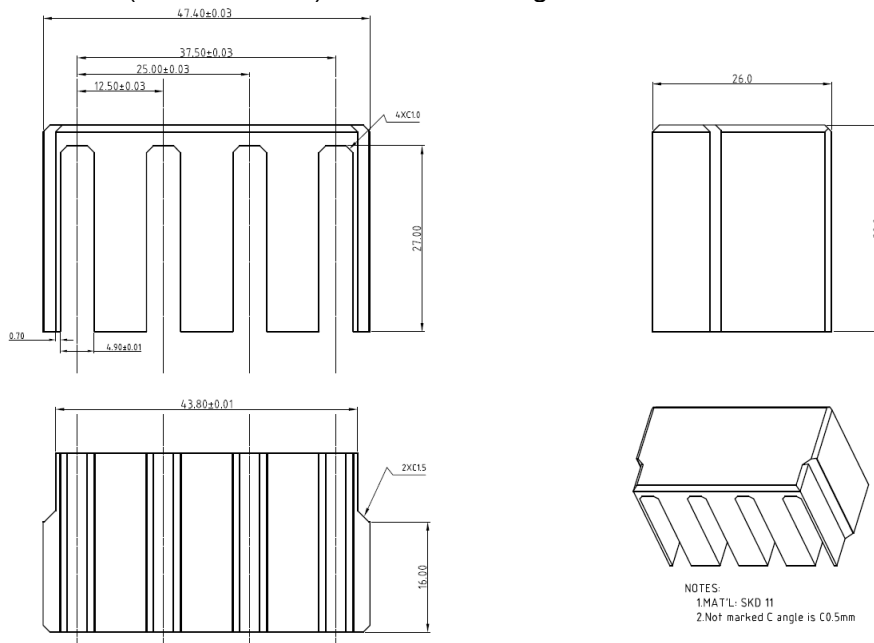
Orthogonal MINI Cool edge connector 1x4 application tools drawing
